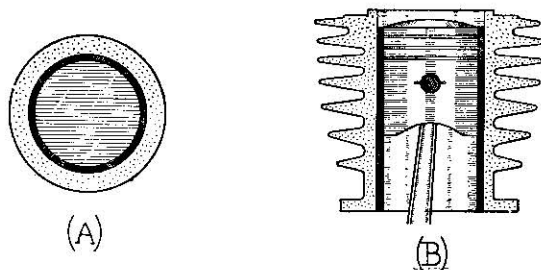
SHOWING GENERAL PRINCIPLE OF LUBRICATION
